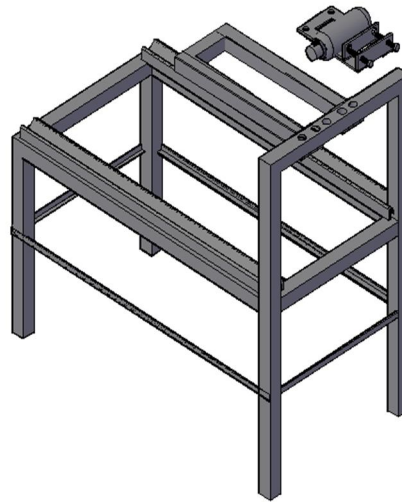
Assembling of Frame and push pull adjuster with motor on arm
